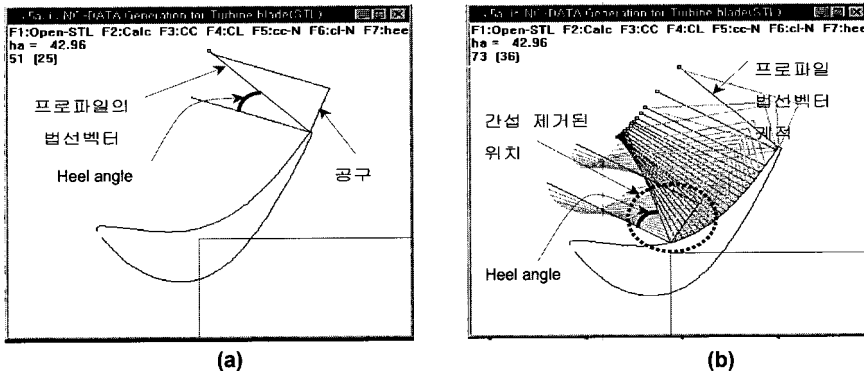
Example of interference-free tool-path in 5-axis machining of a turbine blade (heel angle  $\theta$ =auto detected). (a) flat-end cutter and blade profile (b) interference-free cutter location
